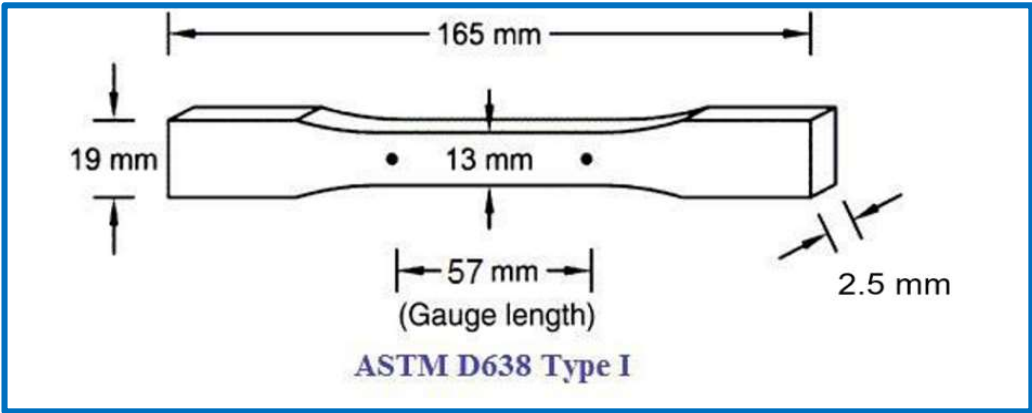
The dimensions of the standard specimen for the tensile test [56].
